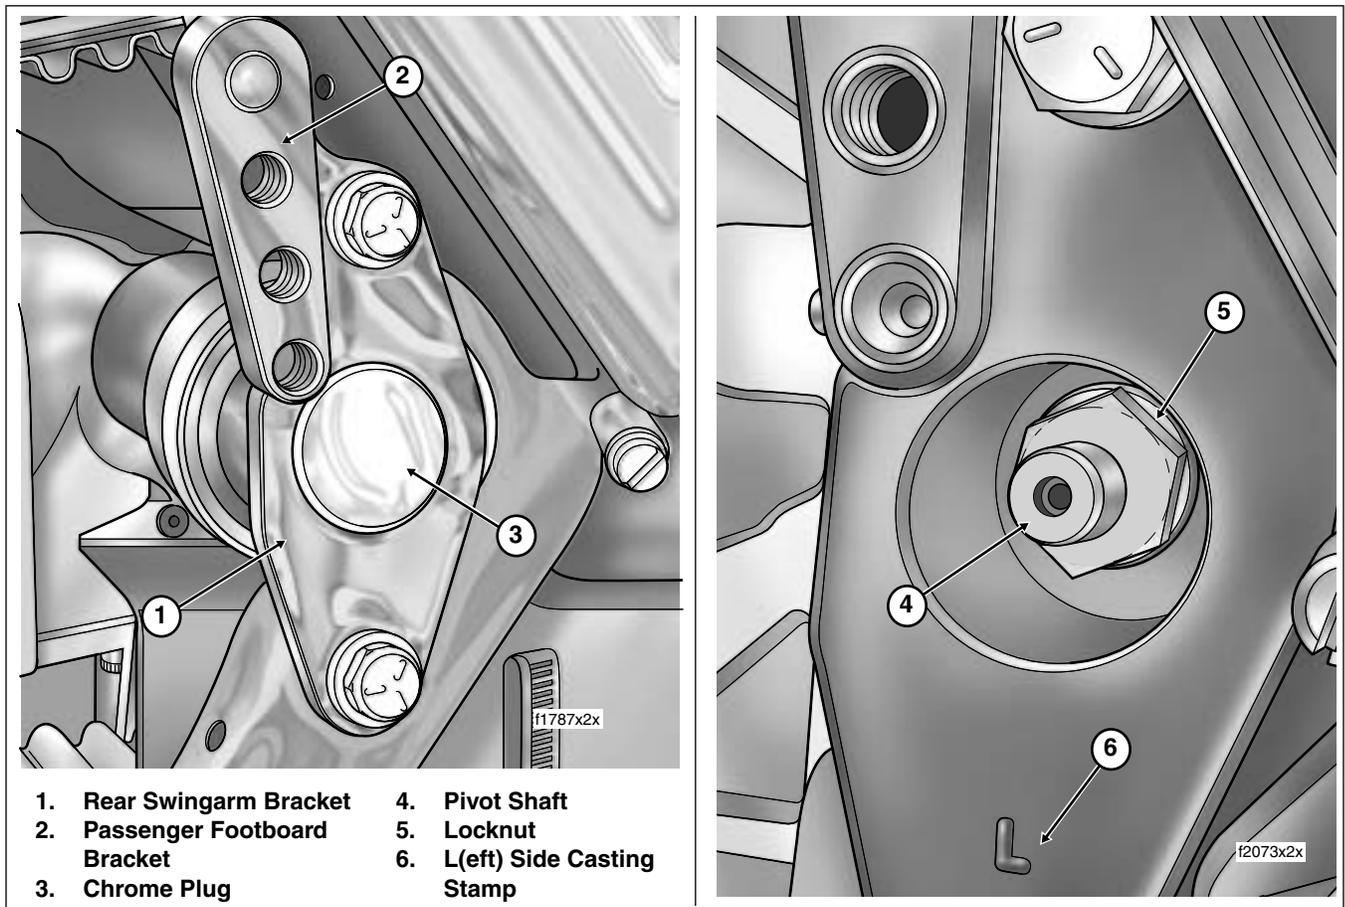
Remove Chrome Plugs and Check Pivot Shaft Locknut Torque (Left Side View)
